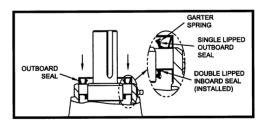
Orientation of Outboard Seal for Installation
